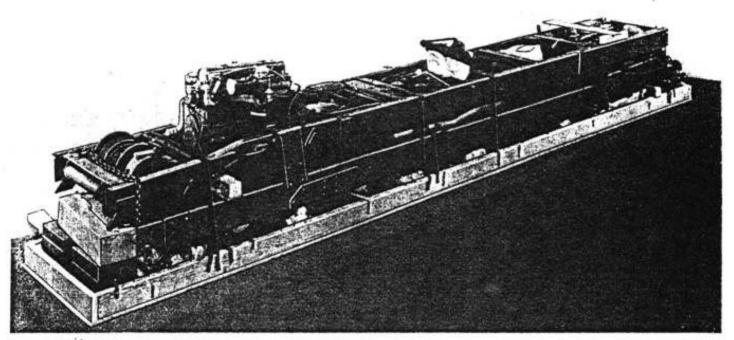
Chassis Box With Loose Parts Removed Preparitory to Removing Top Chassis.
